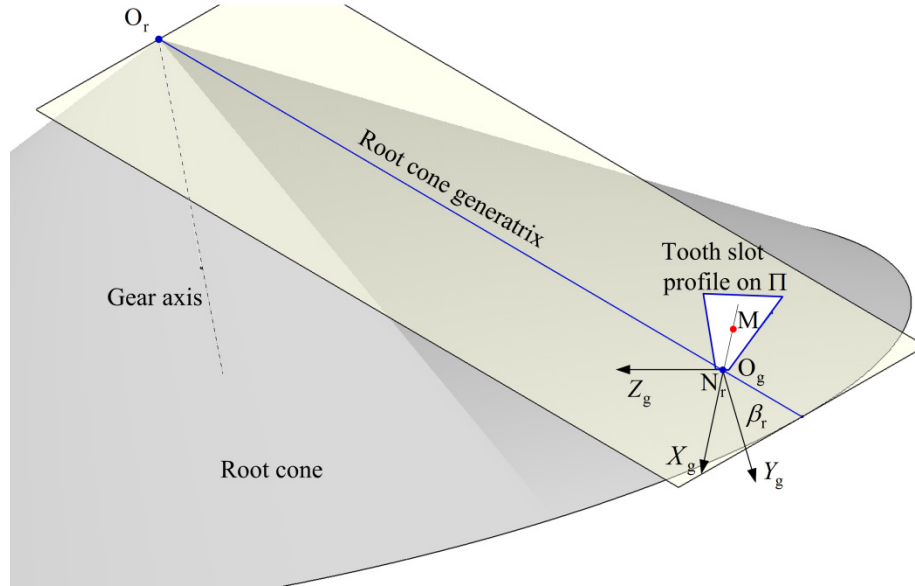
Gear tooth profile on the root cone of the hypoid gear.
